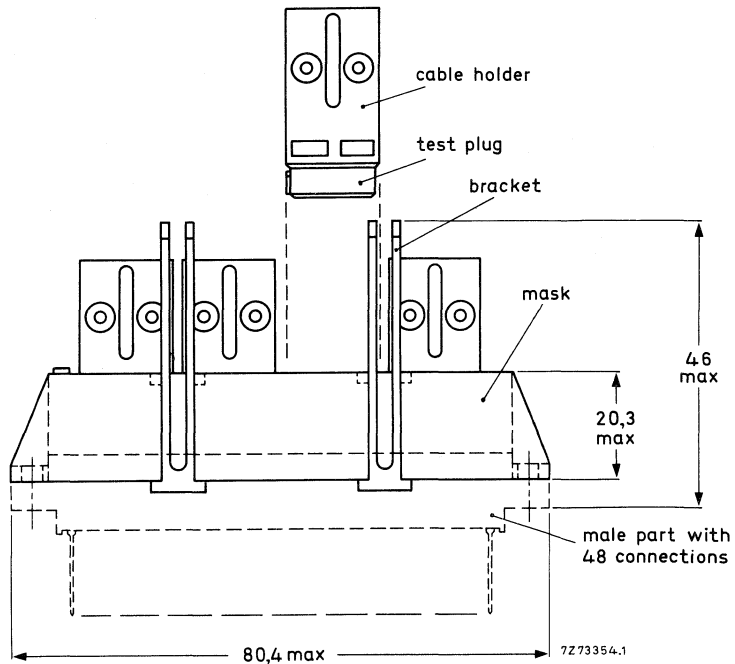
Four test plugs with auxiliary parts; dimensions in mm.
